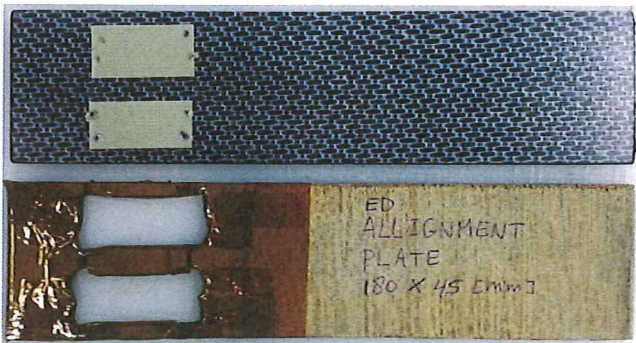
| ED alignment aid for plunge welding EDs to larger plates for hinge welding with square holes identical to the ED dimensions an rounded corners for accessibility of the USW hand plunge welder. The edges are covered with Kapton tape against possible overheating.
